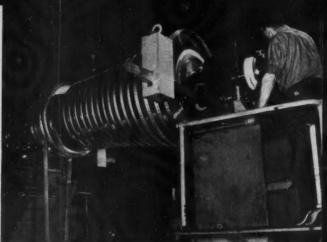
LOW-SPEED balancing machine tells operator where to locate weights needed to balance this high-pressure turbine rotor.
